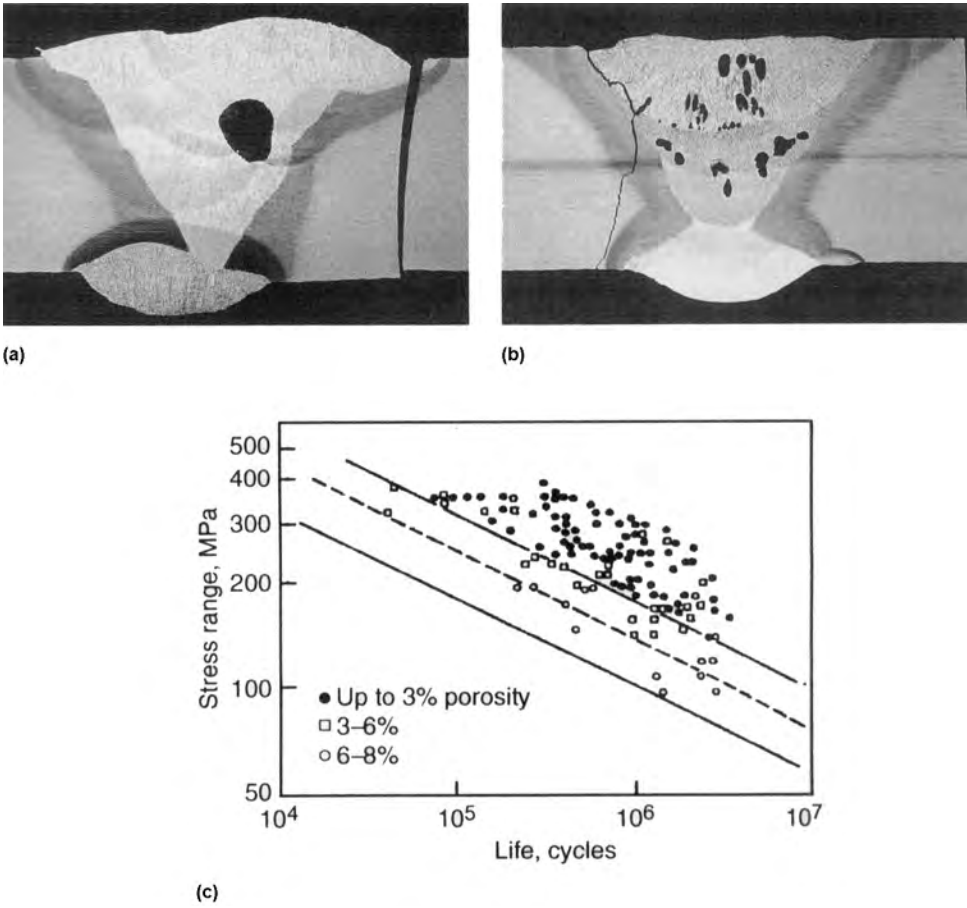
Effect of volumetric defects on fatigue. (a) Slag inclusion in butt weld. Cracking from weld toe. (b) Porosity in butt weld. Cracking from weld toe. (c) Transverse groove welds containing porosity. Source: Ref 16
